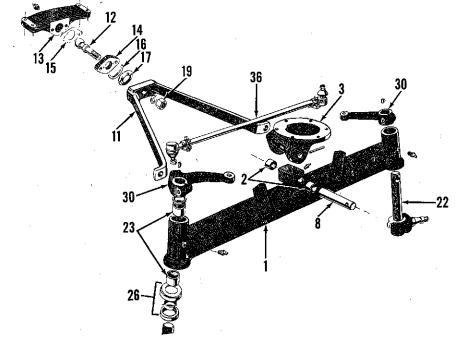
Exploded view of steering axle used on late 303 and all 406 and 1001 models. Refer to Fig. MH754 for legend.
